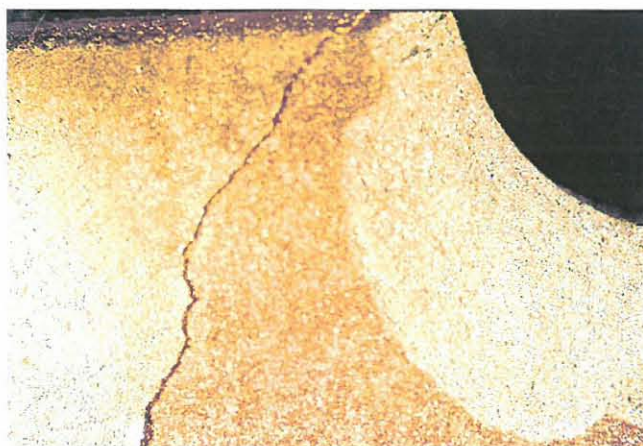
Plating and Epoxy Chip from Aluminium Epoxy Insert
